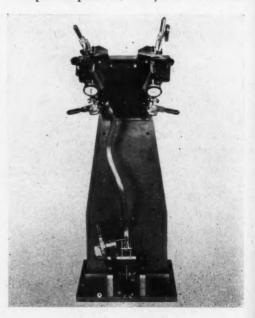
In this fixture, male and female connectors are induction-brazed to the ends of aircraft fuel pipes. Either right- or left-hand parts can be handled
